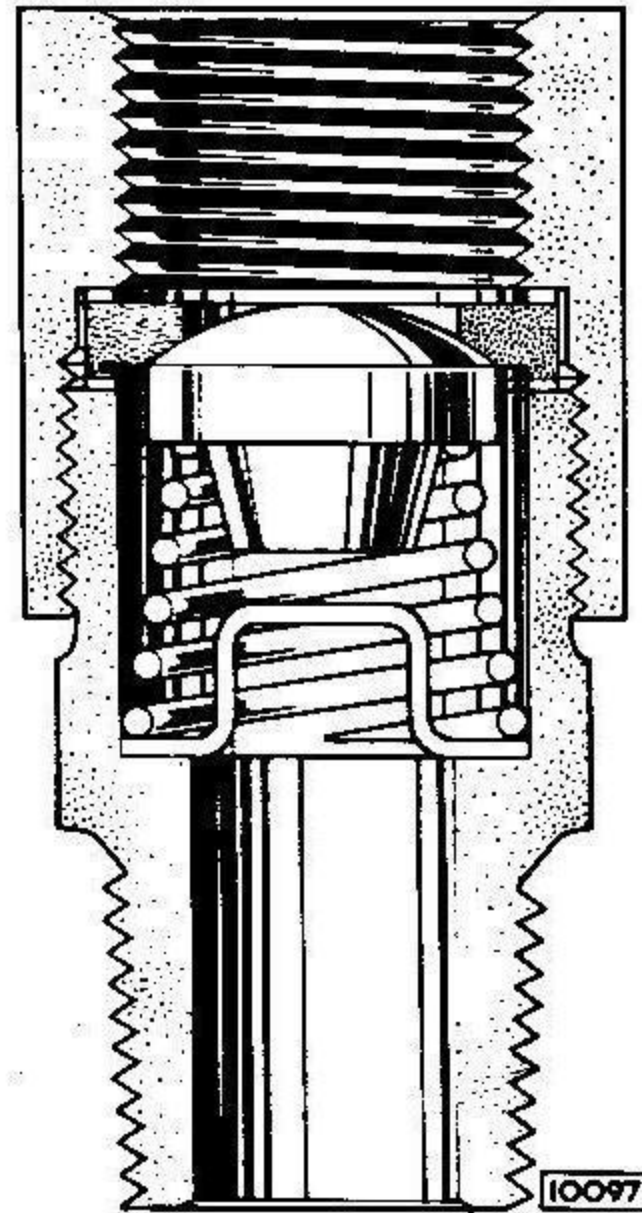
Sectioned view of the Clayton-Dewandre check valve
